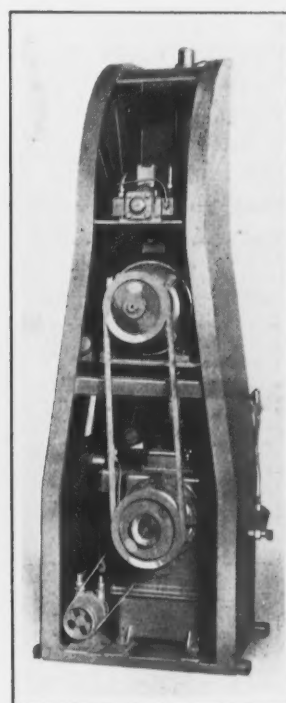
How Machine in Fig. 3 Appears from the Back with Cover Plates Removed
